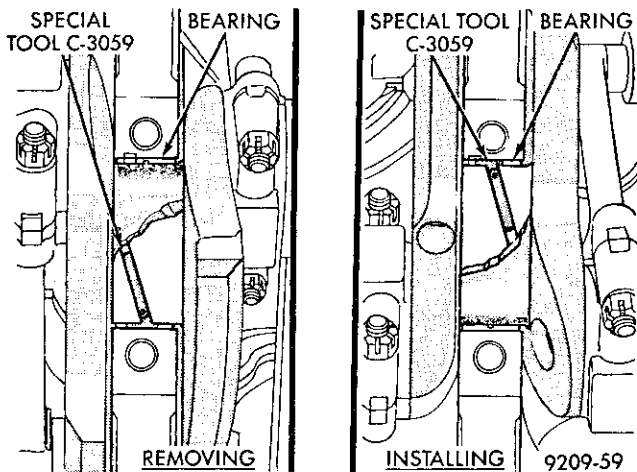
Upper Main Bearing Removal and Installation with Tool C-3059
